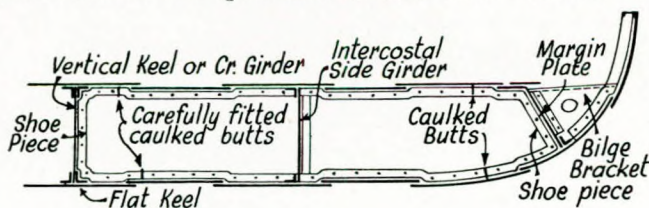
Watertight floor forming boundary to a double bottom tank.
